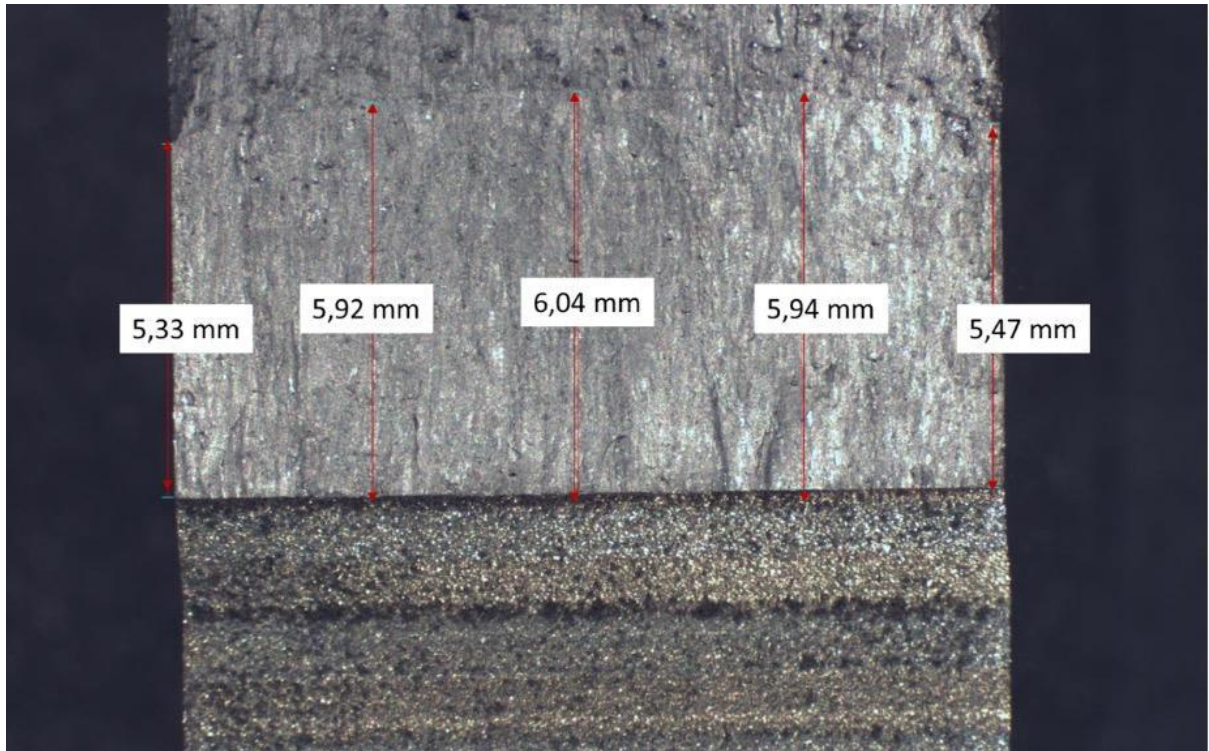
Fracture toughness crack measurement for 6.25 m/s 2
